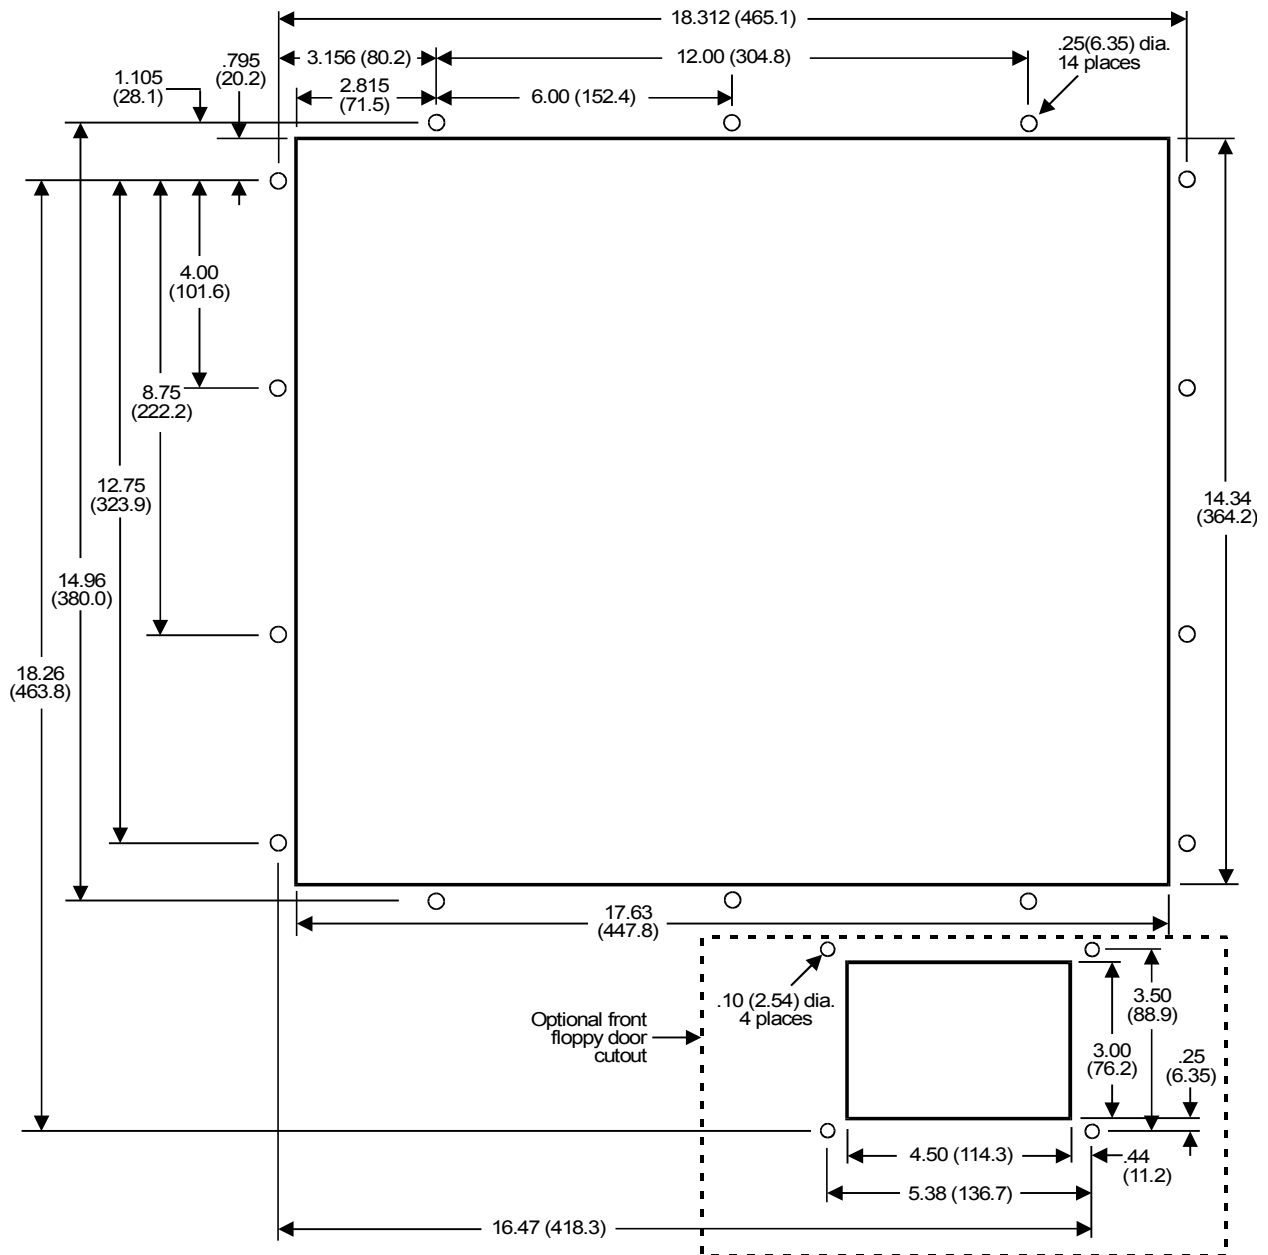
11. 9457 Monitor Module Cutout Dimensions
